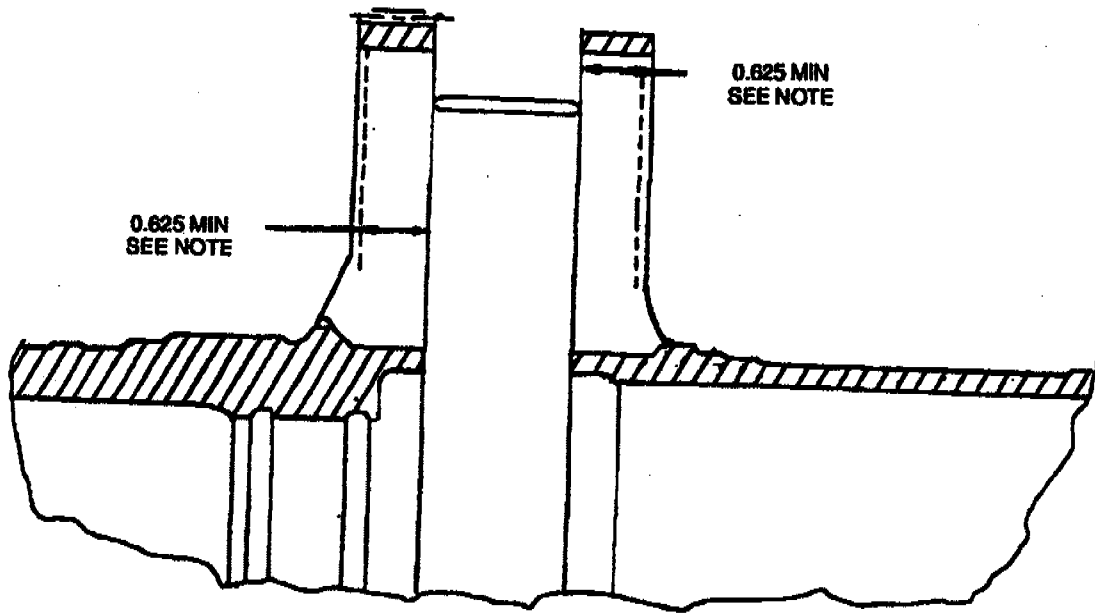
Primary Reduction Gear Assembly Dimensional Inspection Locations (T53-L-701, -701A) (Sheet 3 of 3).
